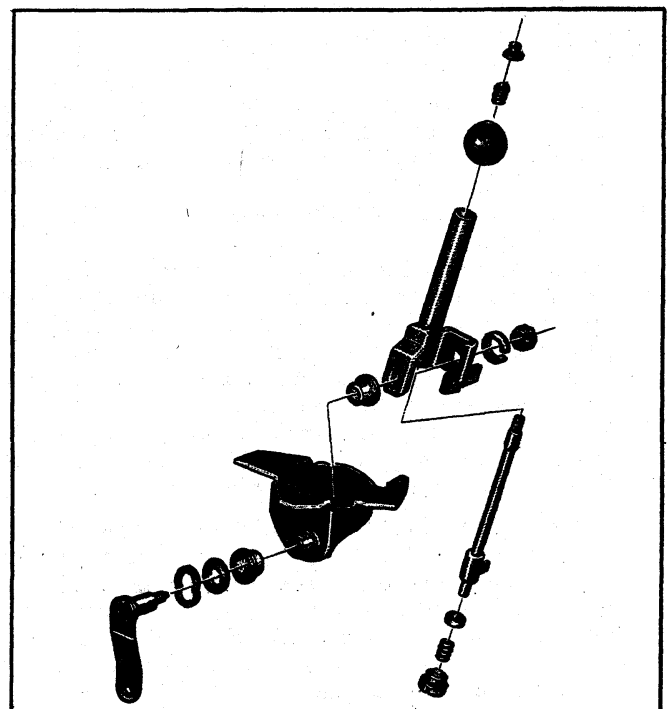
PG - Corvette Control Lever and Bracket Assembly - Exploded
